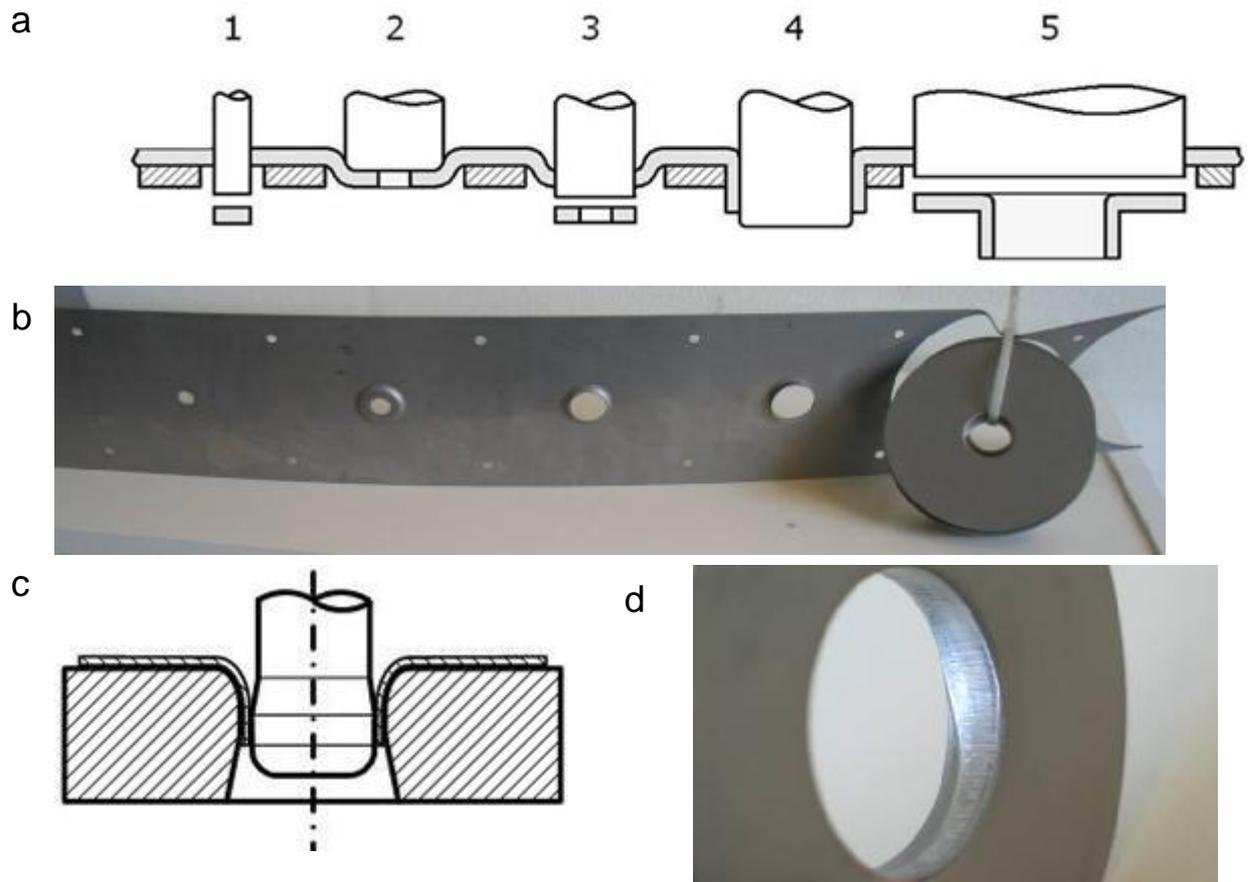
Production test in progressive tool. a) schematic outline of operations b) photo of deformed strip, c) outline of ironing operation d) photo of ironed collar with scoring marks .
